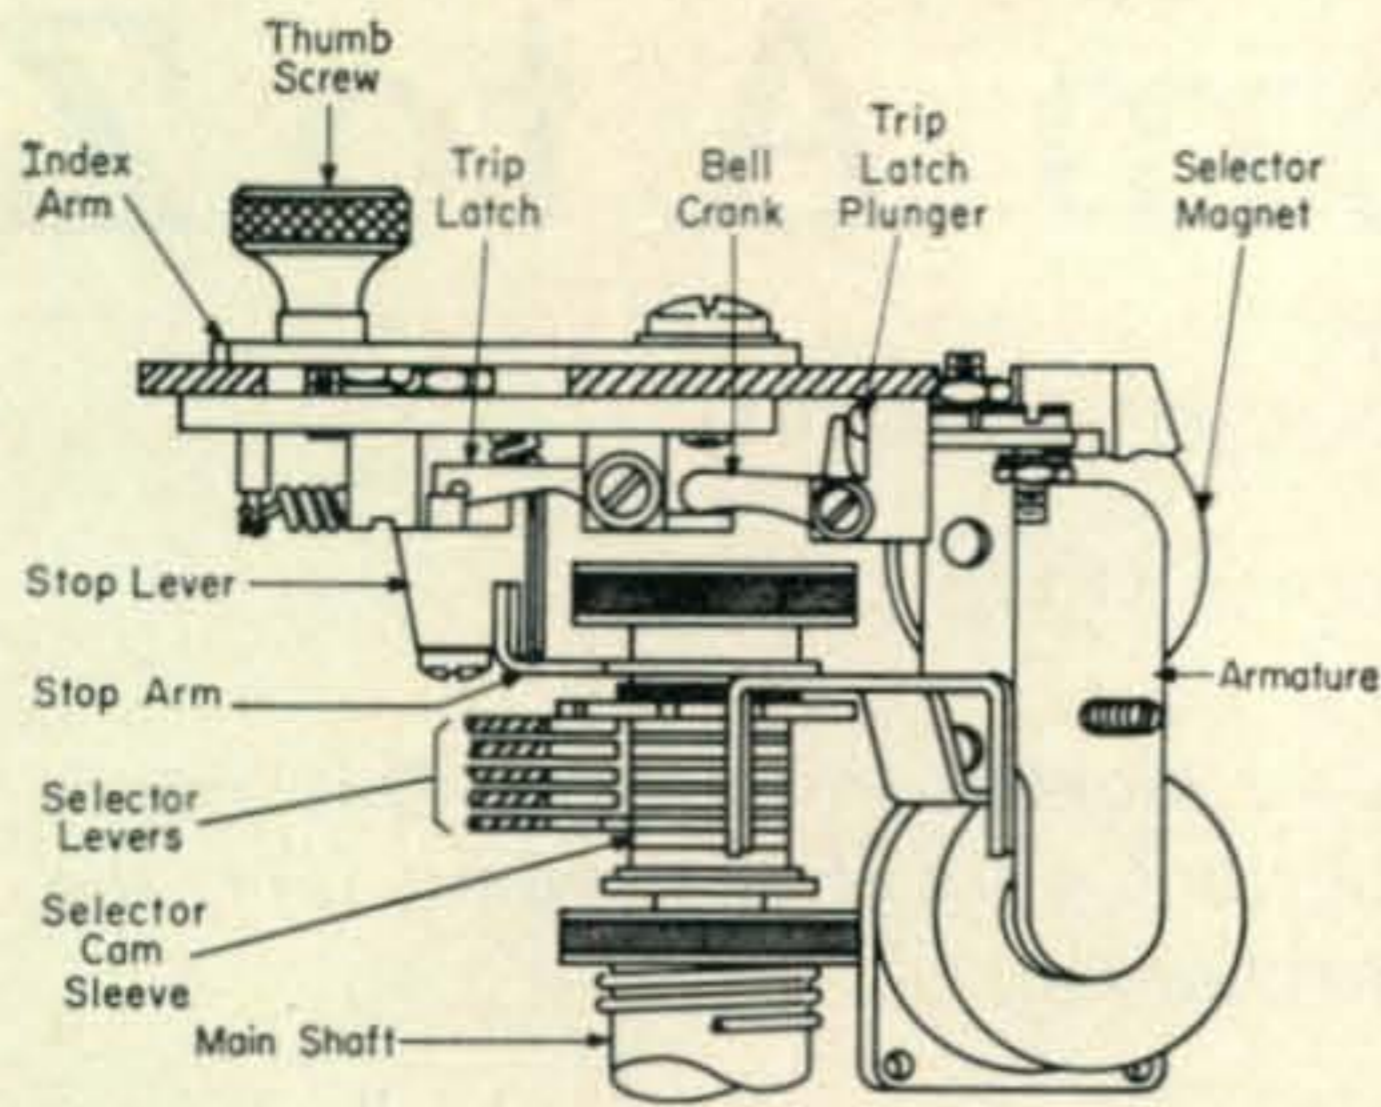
Cross section of the selector unit from the Model 15, identifying the various parts.
